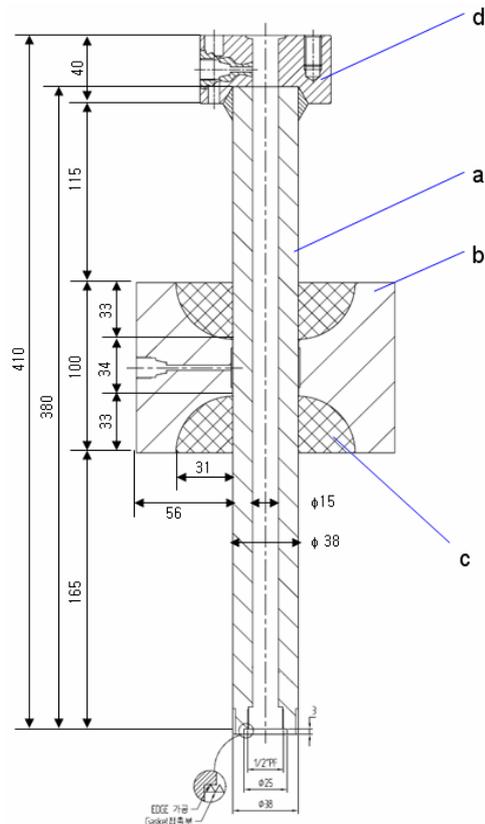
The schematic drawing of BMI mockup, a : Alloy 600 BMI nozzle, b : 304 stainless steel support plate, c : Alloy 182 filler, d : flange for sealing.
